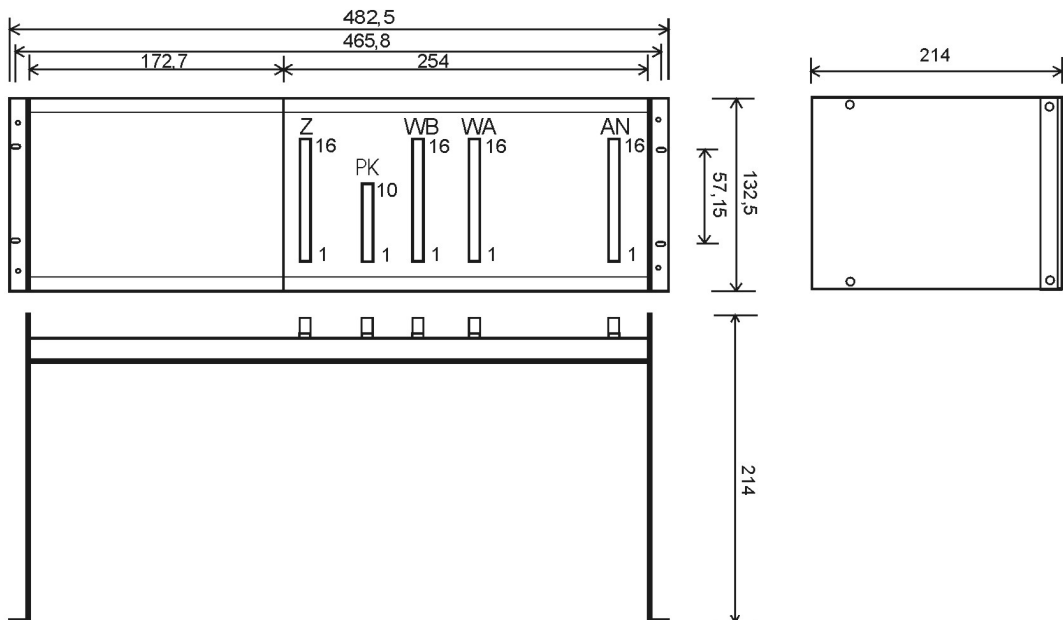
Version 3: Back panel mounting housing housing with a width 84T
